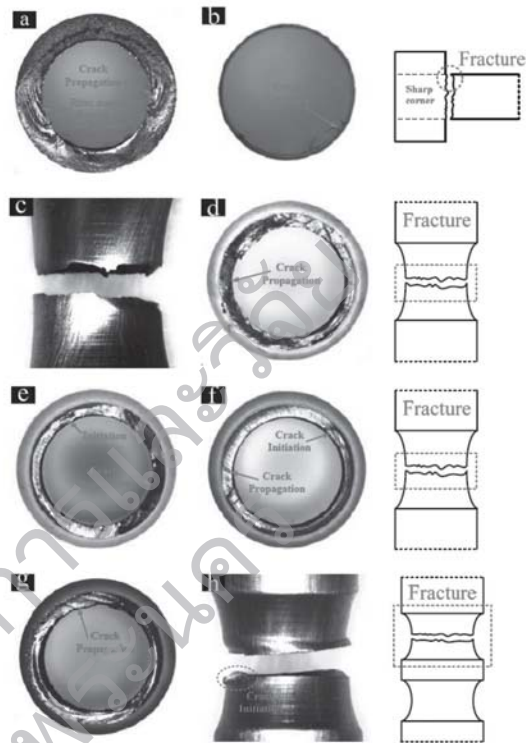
Fracture Surfaces of the Specimens (Flange-model)
